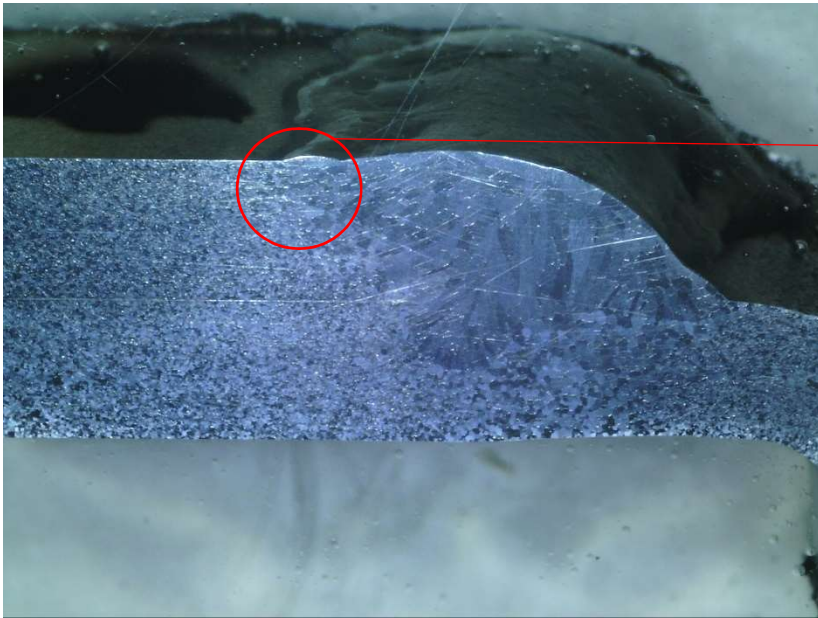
Welded 17-7 PH stainless steel pipe. Ground with 600 grit sandpapers and then deeply etched with Stainless steel weld etch for at least 1 minute.
